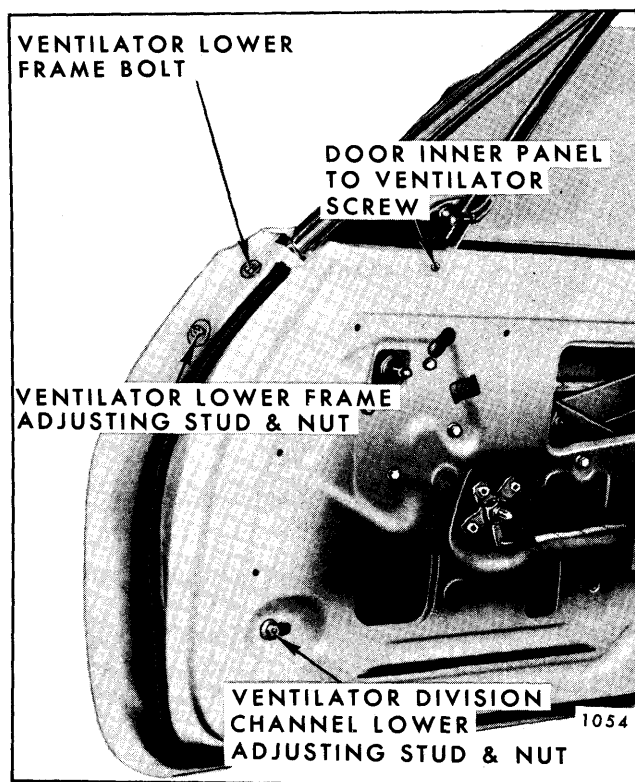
Front Door Ventilator Attachments - "Z" Styles
